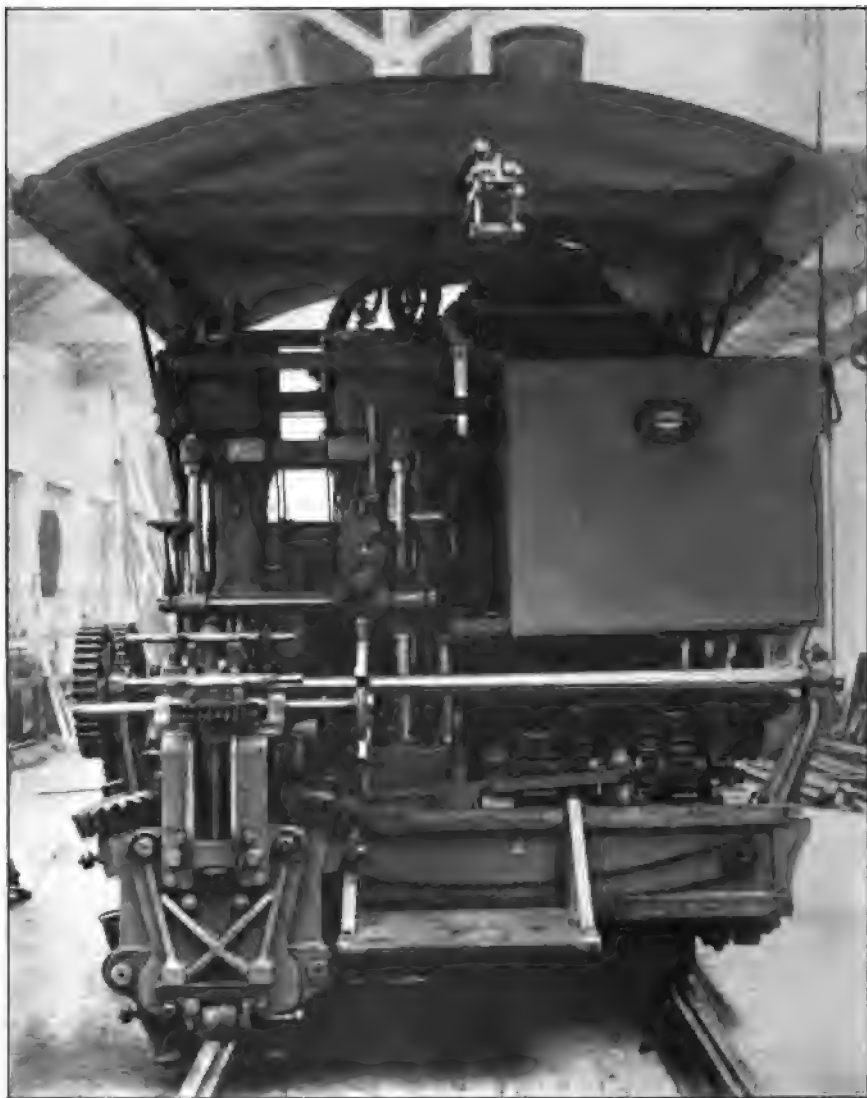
A FRONT VIEW OF THE ROLLING-ON MACHINE
